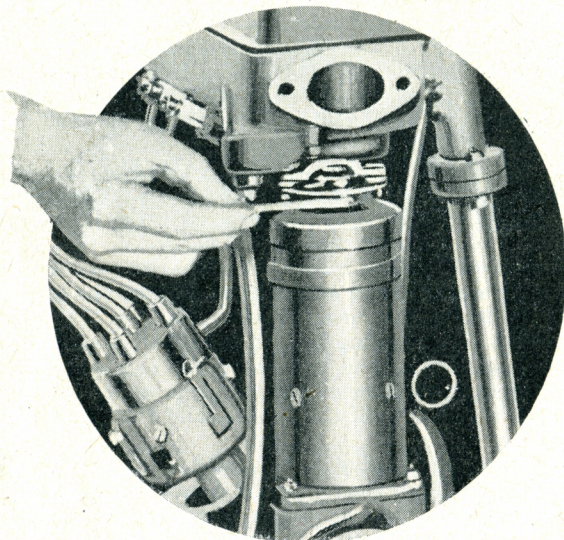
REMOVING THE COUPLING BOLTS OF THE FLEXIBLE COUPLING
